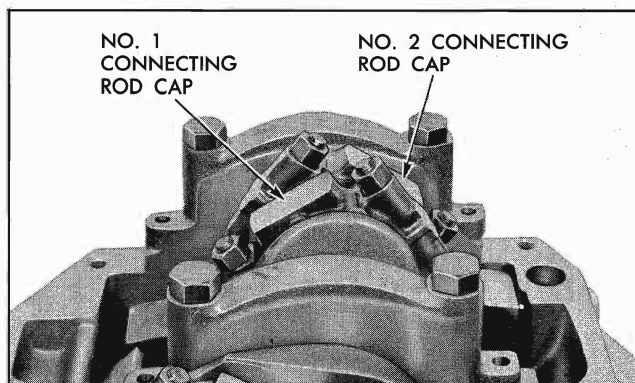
Crankshaft Positioned for Removal of No. 1 and No. 2 Connecting Rod Caps
